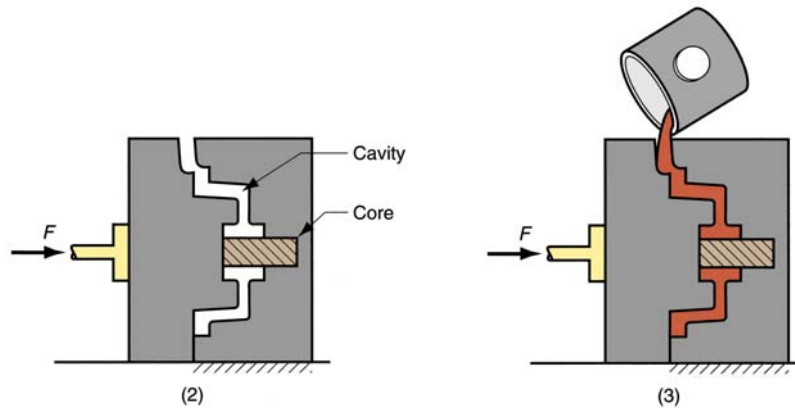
Steps in permanent-mold casting: (2) cores (if used) are inserted and mold is closed; and (3) molten metal is poured into the mold. As the metal solidifies, the mold is opened and the part retrieved.
